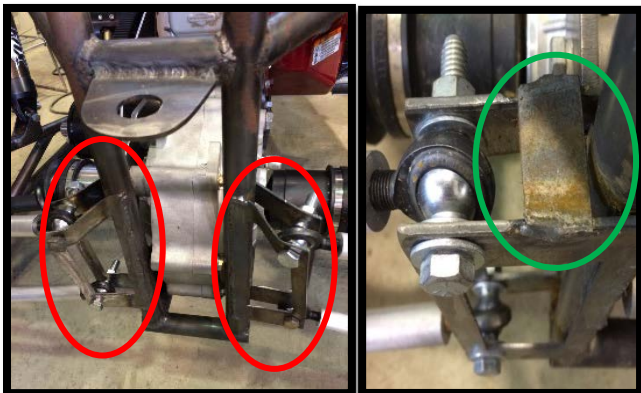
Mounting Bracket Rev1 - Rev2 Change
